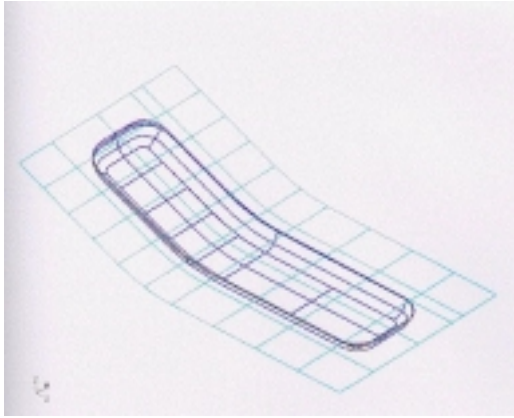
Reconstructed Handset Outer Surface Used to Form the Cavity Mould Parting Surface
